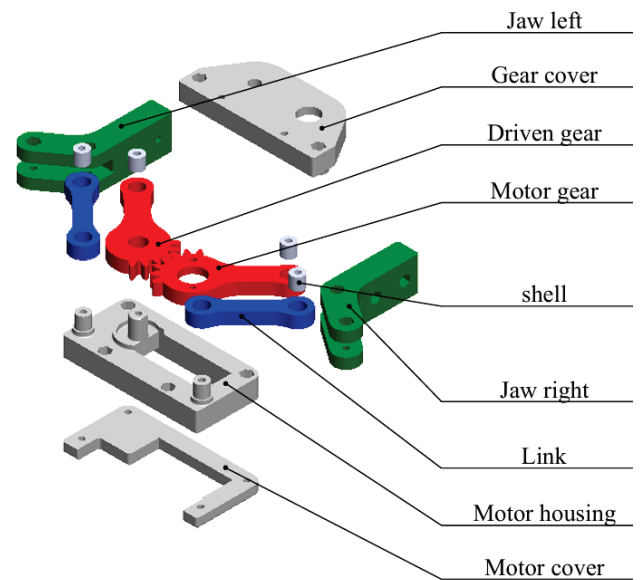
3D model exploded view of the gripper assembly with associated parts designed for production using AM technology
